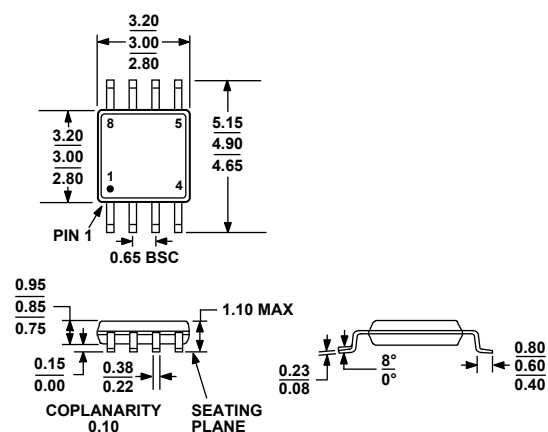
8-Lead Mini Small Outline Package [MSOP]
